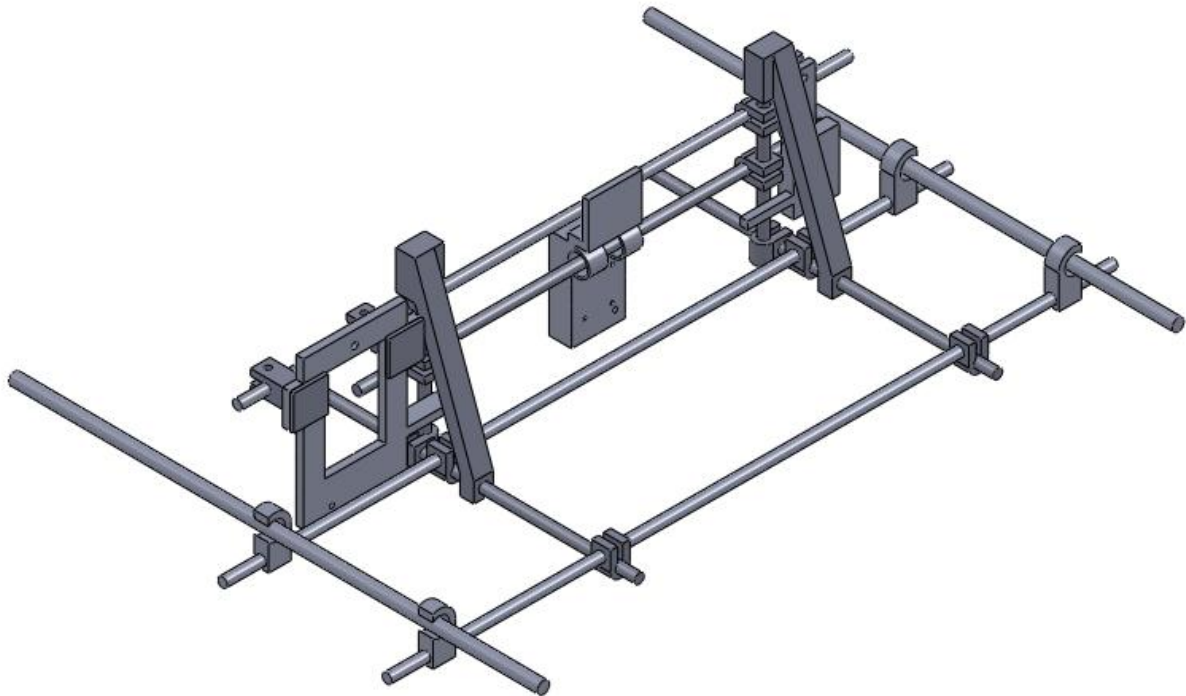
ROD FRAME CARRIAGE DESIGN
